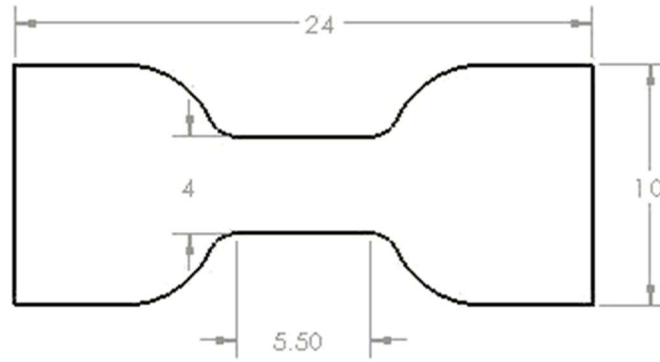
Drawing of the tensile specimen with dimensions in mm used for mechanical characterization
